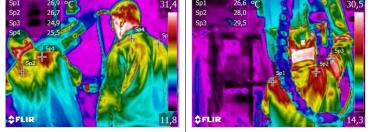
Thermographic images of the operator performing spot welding.
